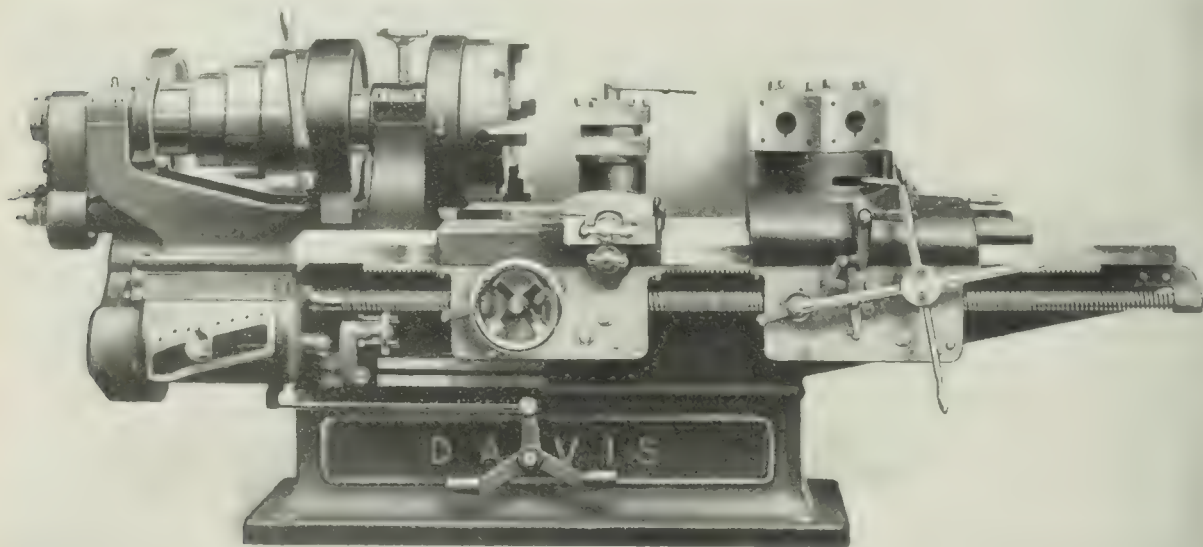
A 26-In. Turret Boring, Forming and Turning Lathe Built by the W. P. Davis Machine Company, Rochester, N. Y.
